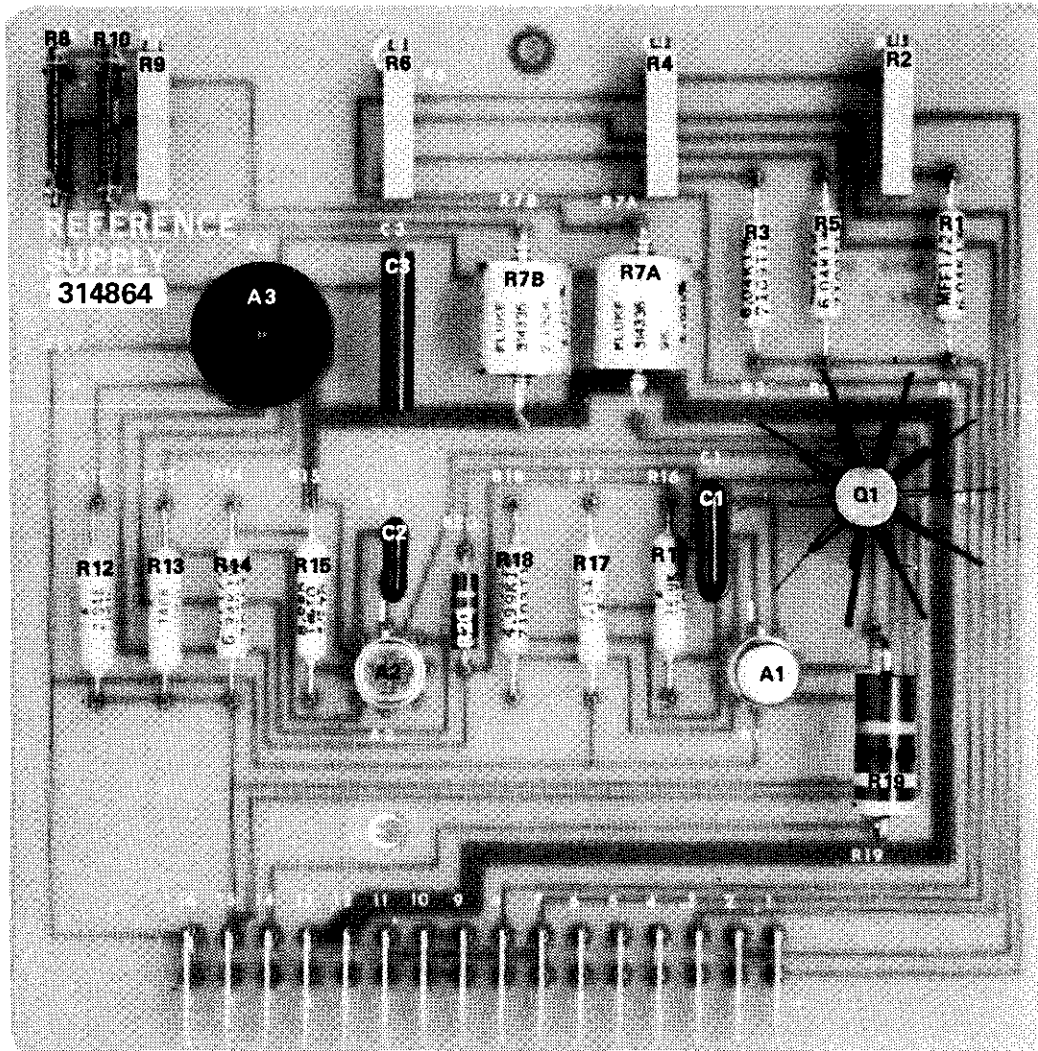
REFERENCE SUPPLY PRINTED CIRCUIT ASSEMBLY
